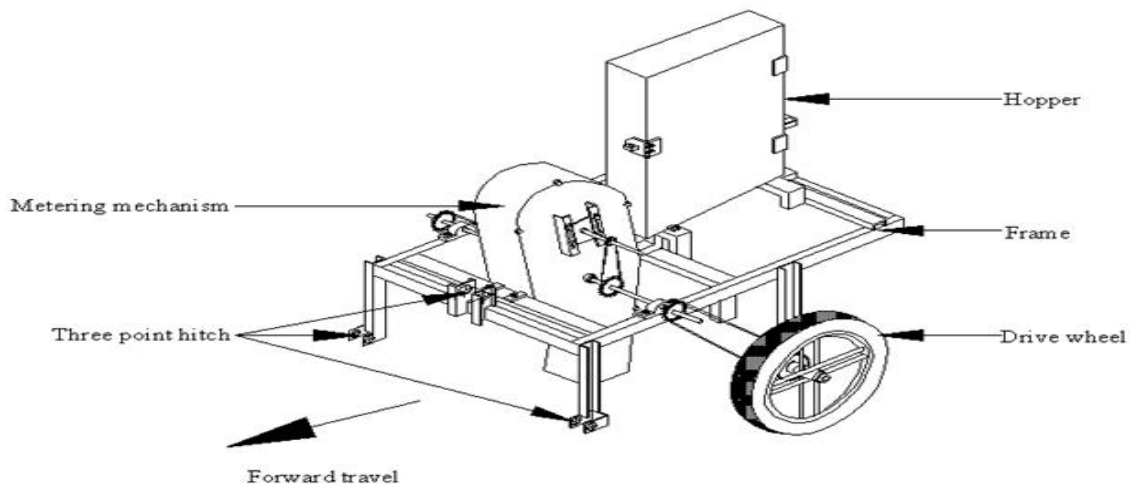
Isometric Drawing of the Yam Metering Device. To show components, safety shields on chain drives have been removed
